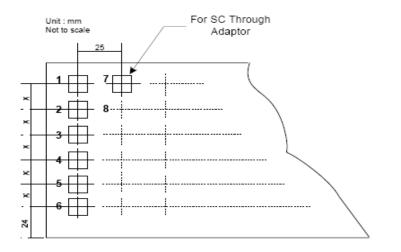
Typical SC patch panel of shelf unit (minimum spacing required)
